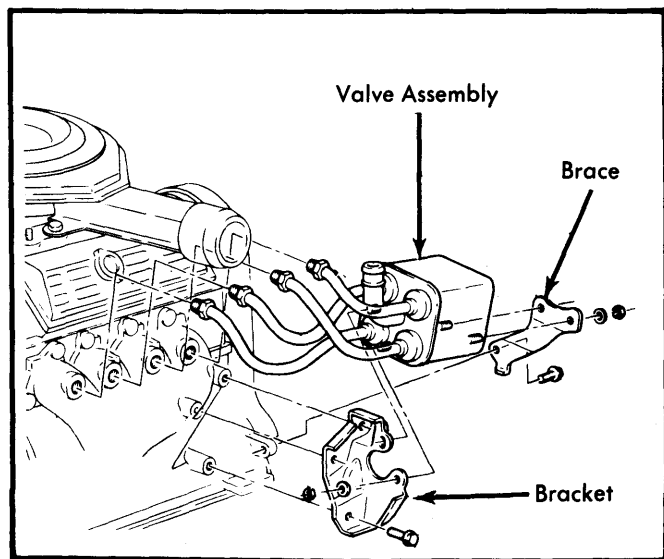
Pulse Air Valve Mounting Location Shown (Chevette Illustrated; Others Similar)
